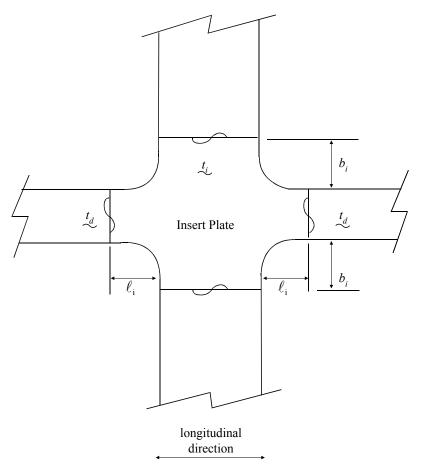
Hatch Corner for Longitudinal Deck Girder (1998)
